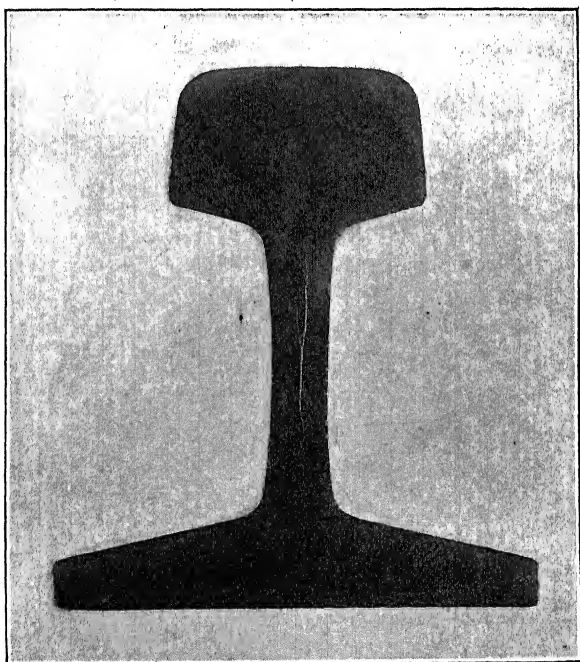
SULPHUR PRINT OF SECTION FROM FRONT END OF A RAIL FROM INGOT No. 6, CAST IN ORDINARY MANNER FROM PIPING STEEL. THE PIPE SHOWN EXTENDS INTO THE C RAIL.
